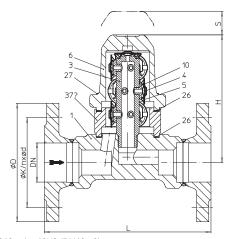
1....10K2 (DN40-50) with 10 capsules, with flanges
